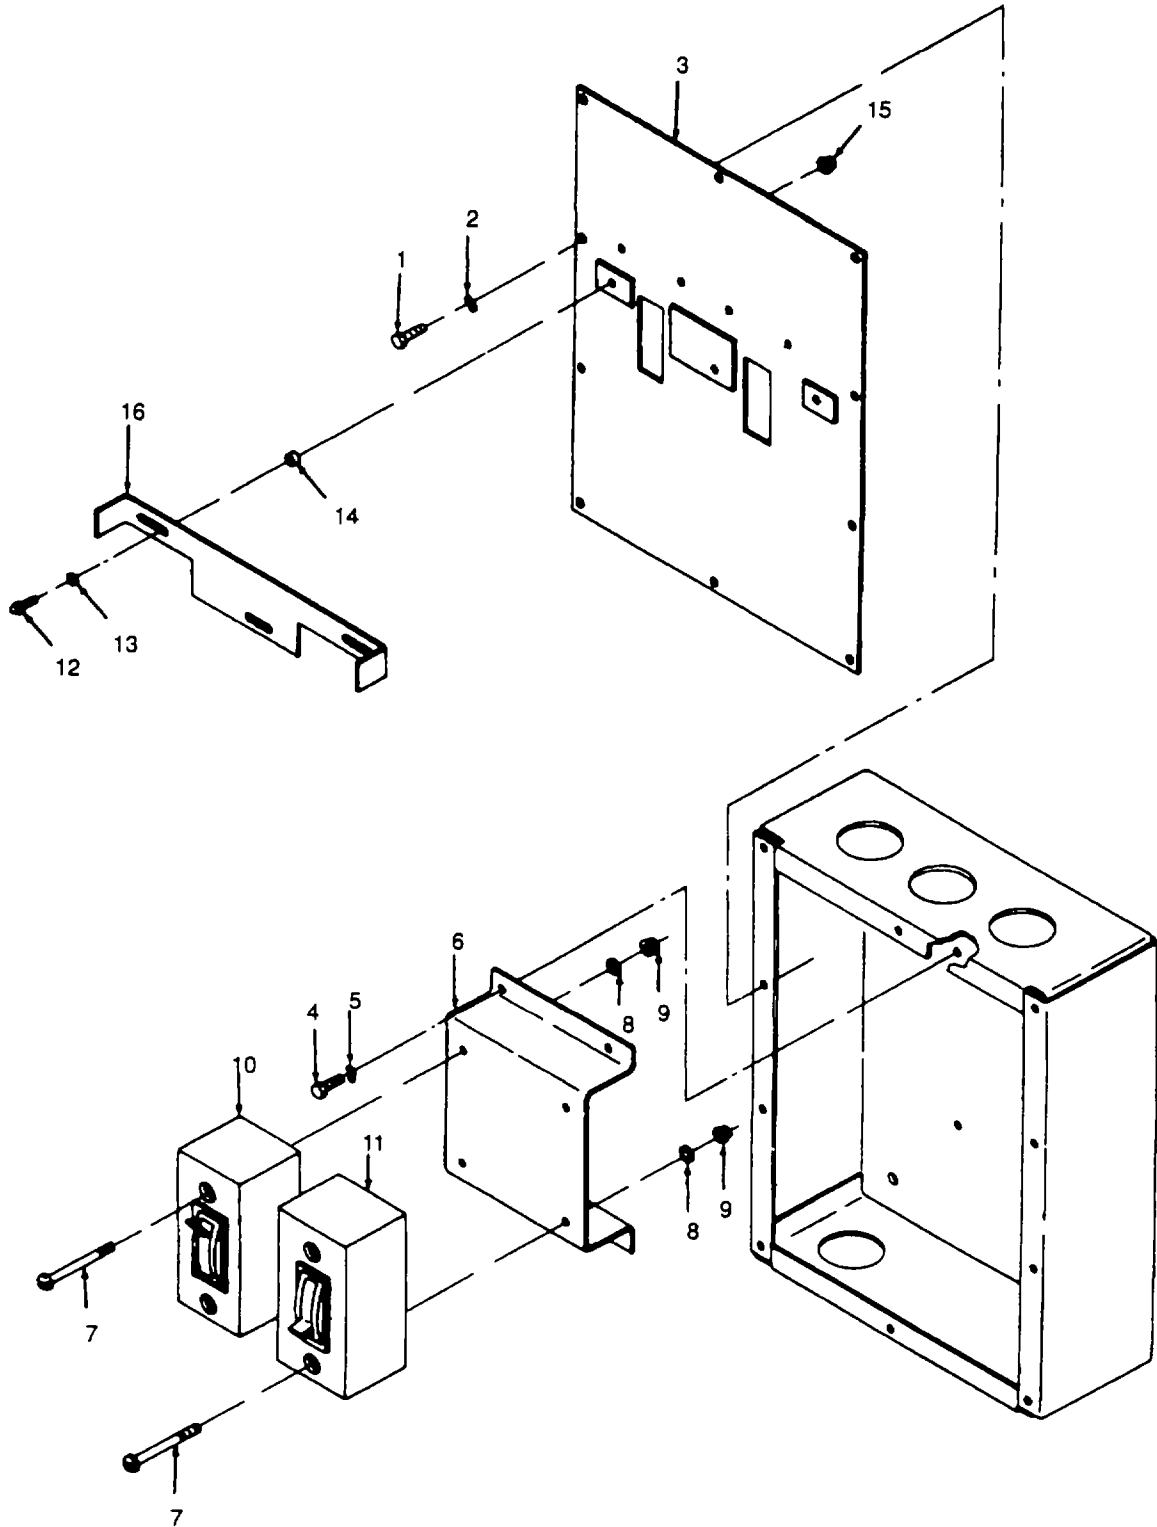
Utility/Set Circuit Breaker Assembly (Sheet 1 of 2)
